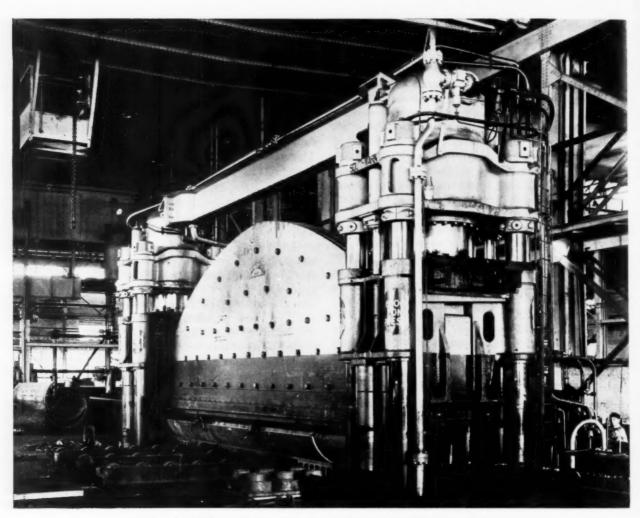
6000-ton hydraulic press with shell section in dies. Press operator at lower right and crane operator at upper left
